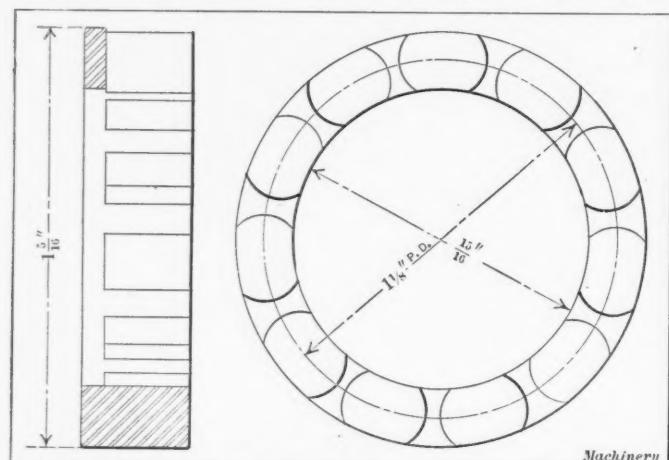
Type of Roller Bearing Cage for which Langelier Drill Head was designed
